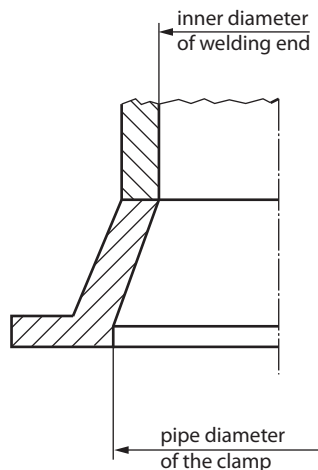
Prinziple of inner diameter for clamp and welding
